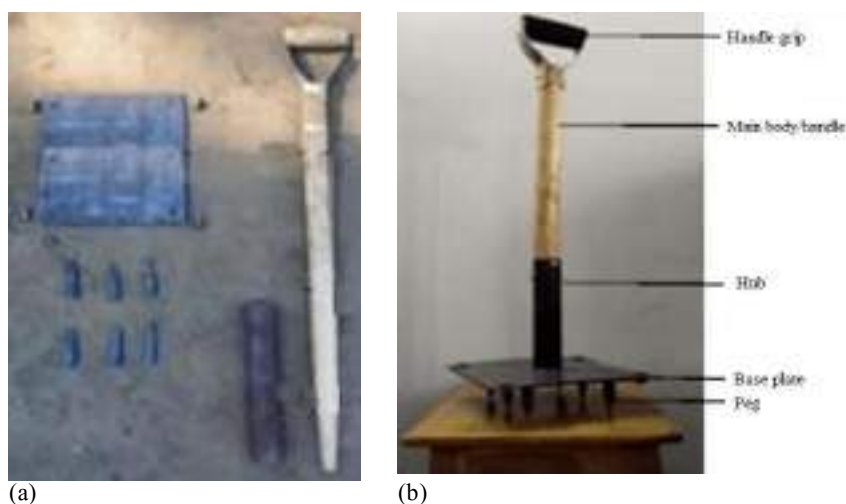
(a) Exploded view (b) complete view of the improved multi-peg hand dibbler
